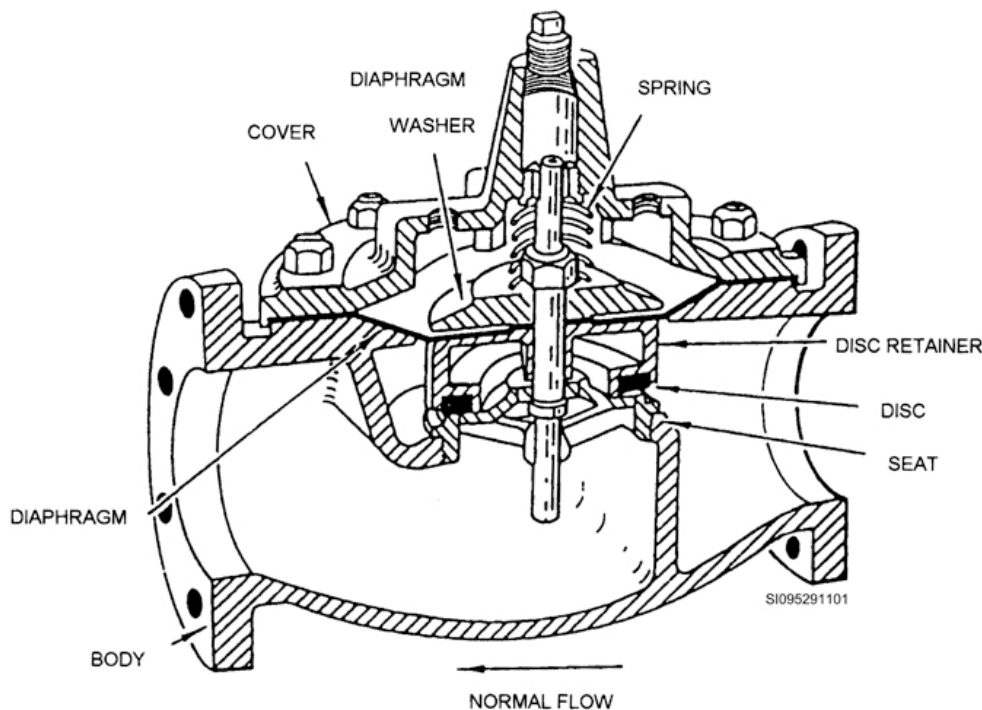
Main valve body. (By courtesy of Cla-Val Co.)
